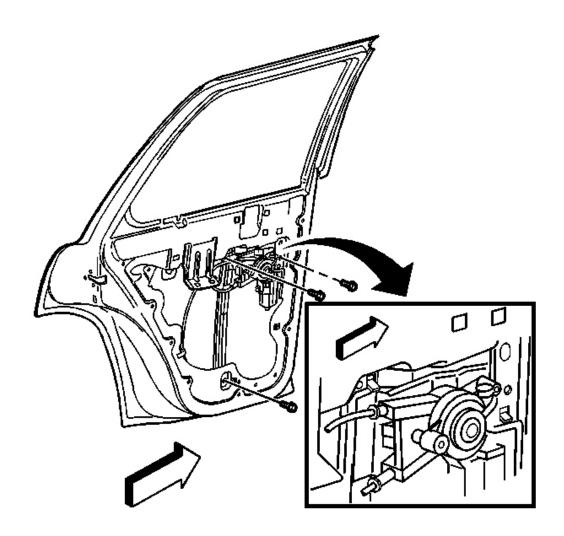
View Of Window Regulator Assembly Courtesy of GENERAL MOTORS CORP.
